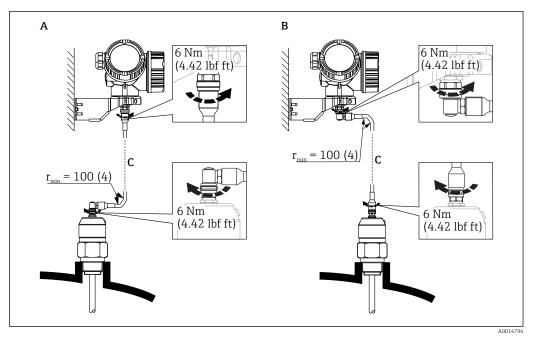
Mounting the electronics housing with the mounting bracket. Unit of measurement mm (in)
